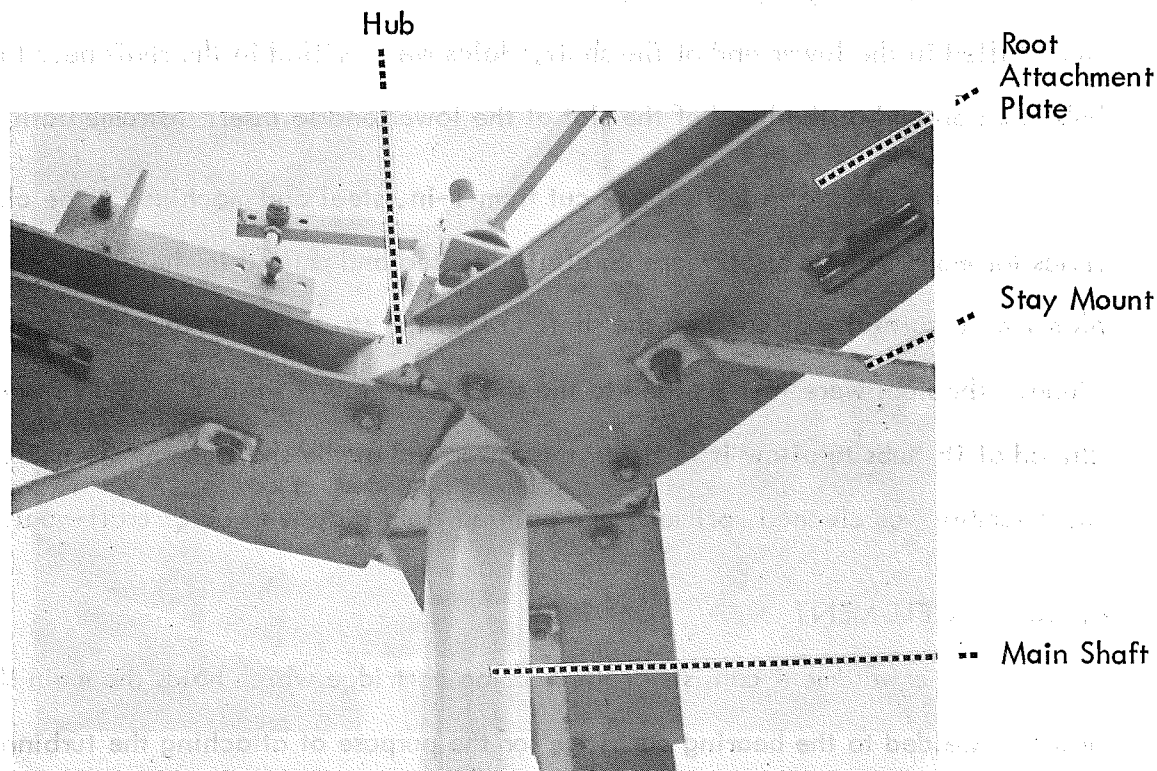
Upper Strut Root Section and Strut Stay Mount.
